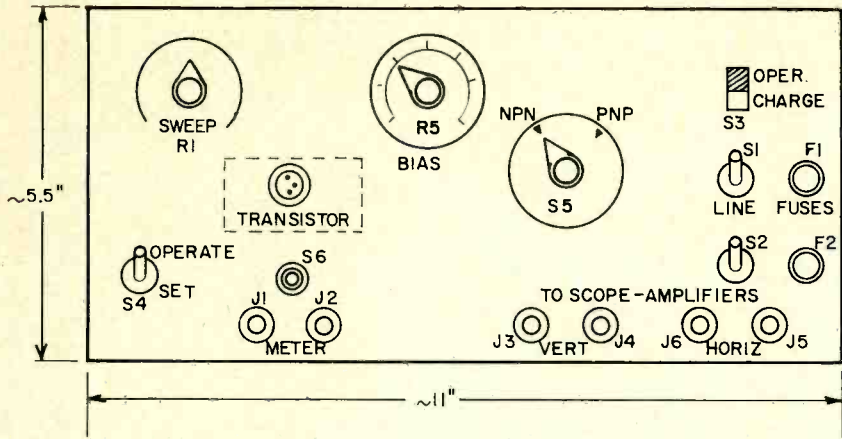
Suggested front-panel layout. Note second transistor socket on panel, wired in parallel with one on board. Use plug (made from third transistor socket) and cable between sockets on panel and the printed circuit board.
